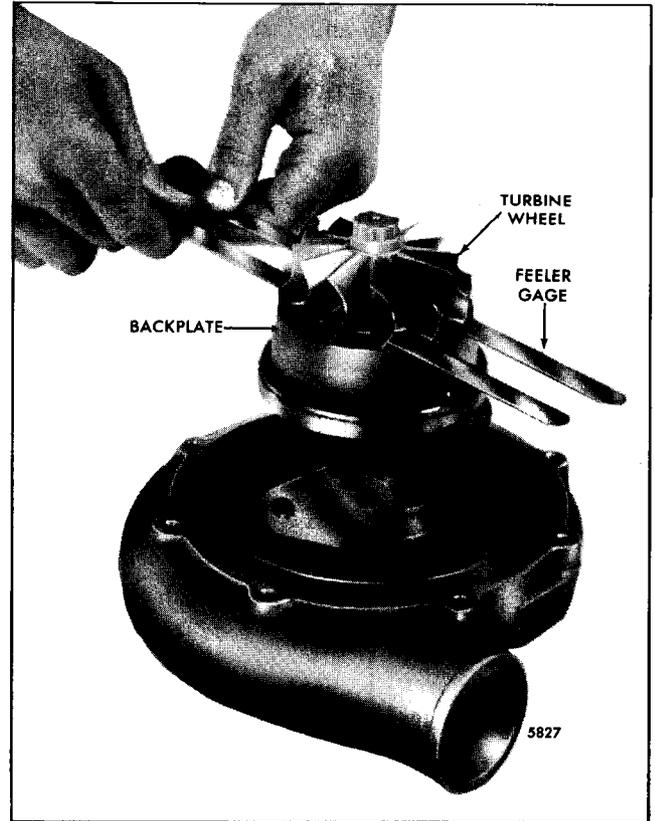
Checking Turbine Wheel to Backplate Clearance
